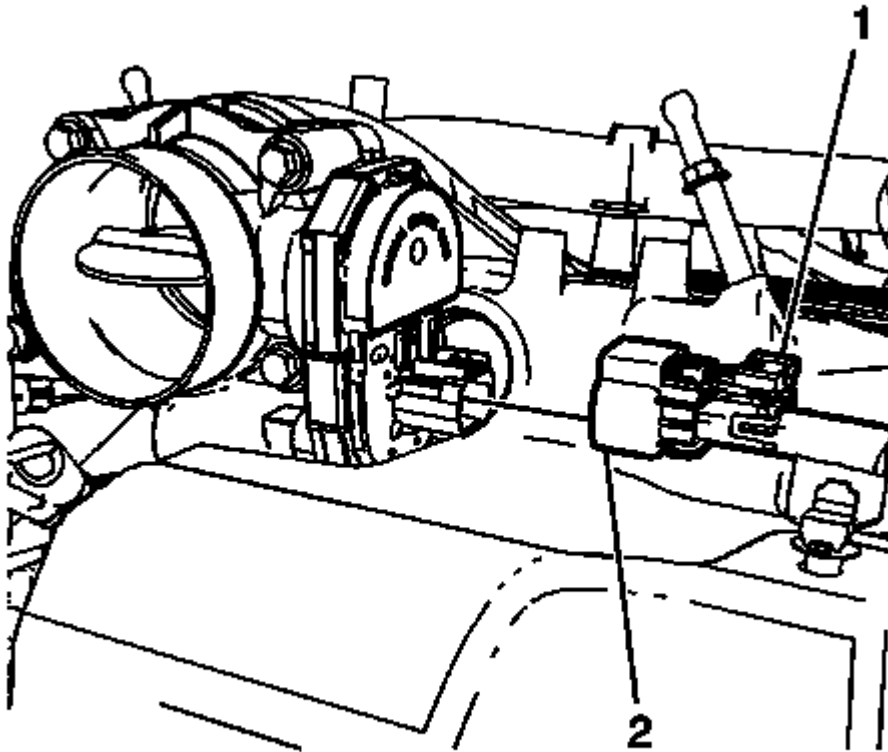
Identifying Purge Solenoid Valve Electrical Connector Retainer
